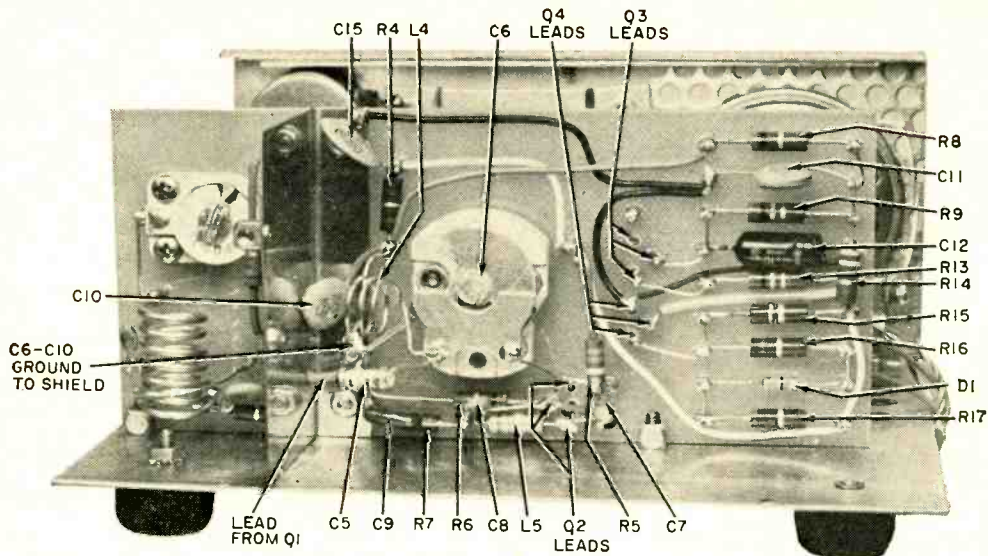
Signal from Q1 stage left of shield is coupled to detector by wire through hole in shield. R.f. and squelch circuit transistors mount in sockets on front face of circuit board.
